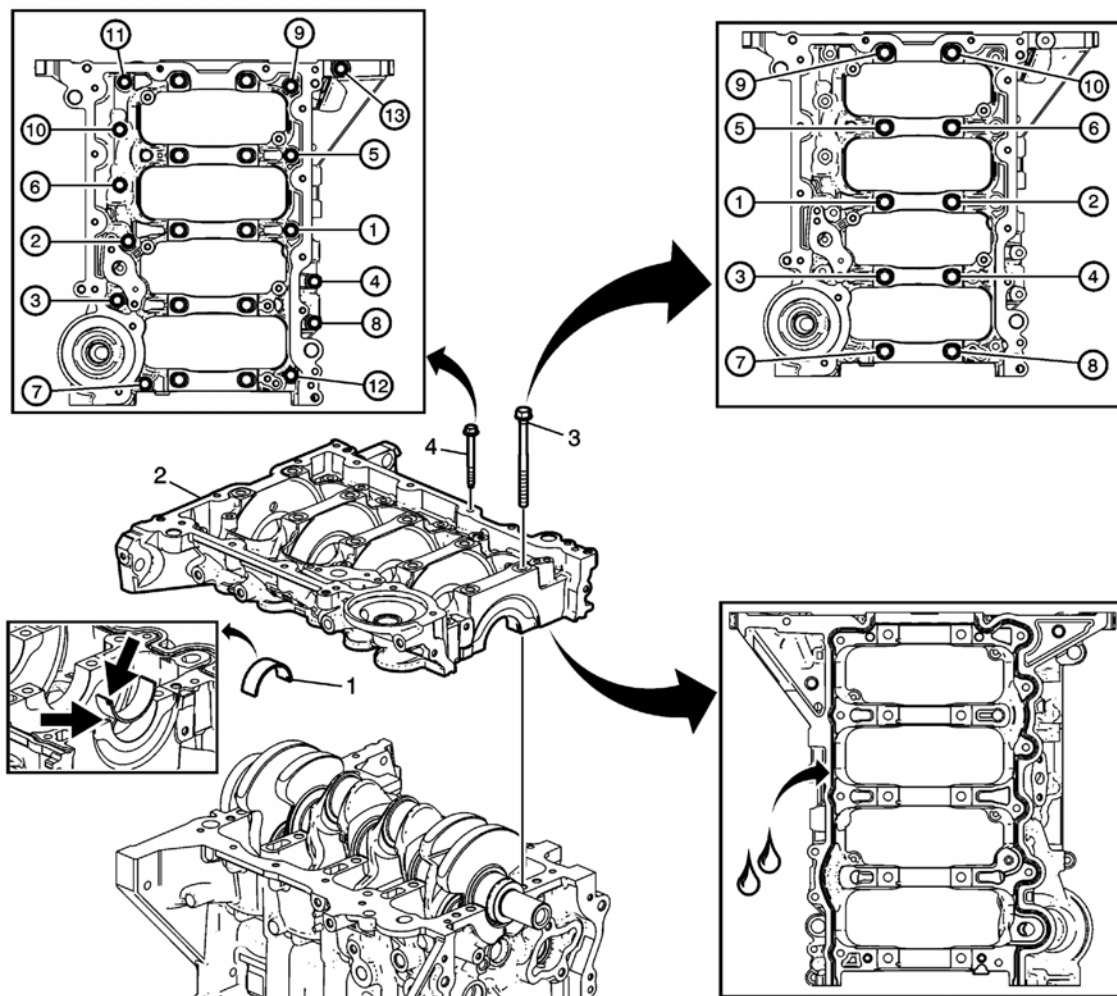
Lower Crankcase With Bolt Tightening Sequences
